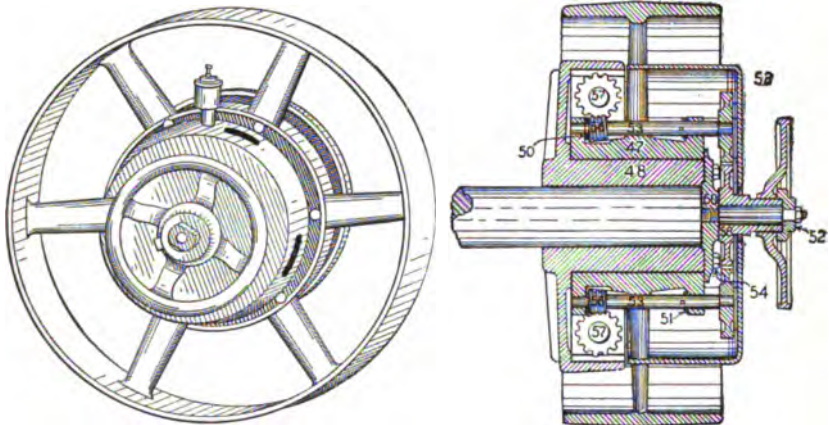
View, worm-gear clutch. FIG. 239.—Section, worm-gear clutch.
